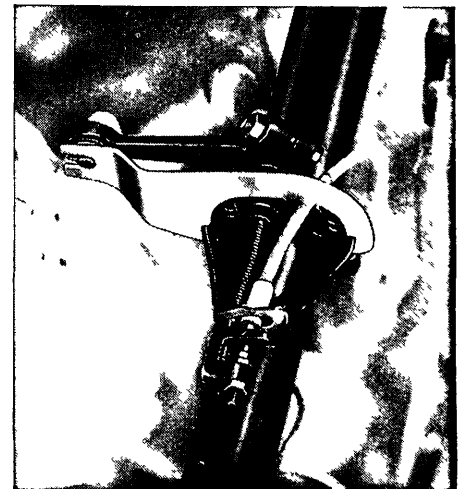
Gearshift control rod adjusting gauge, 1939 with synchromesh transmission
